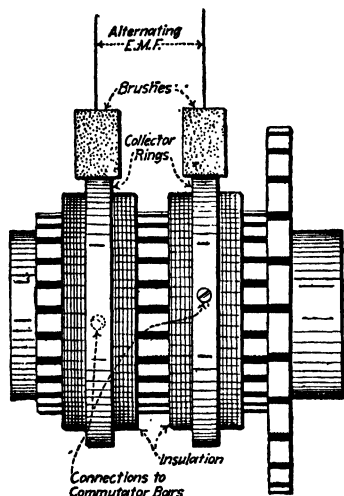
Showing how the commutator of a bipolar direct-current generator can be fitted with collector rings to impress an alternating e.m.f.
